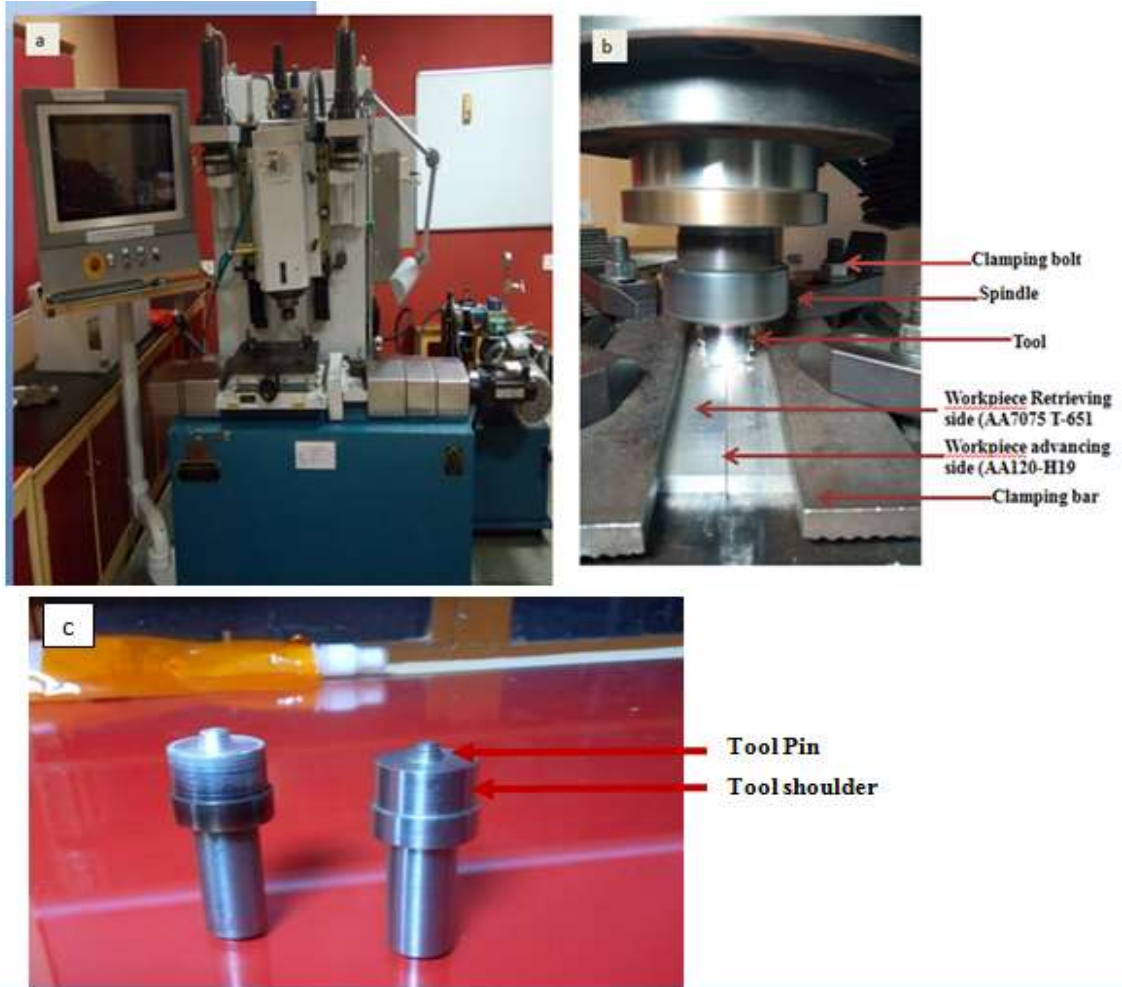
Plate III: (a) Stir welding Equipment (b) Backing plate and clamping system (c)
